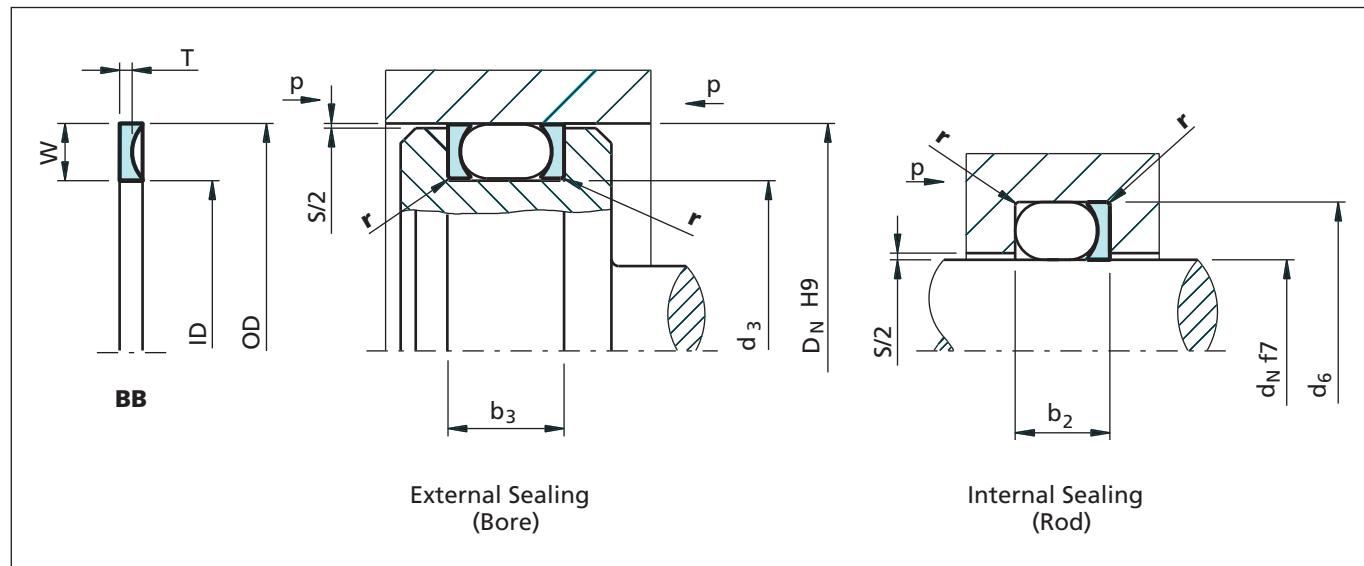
Installation drawing internal and external sealing, concave Back-up Ring type BB
